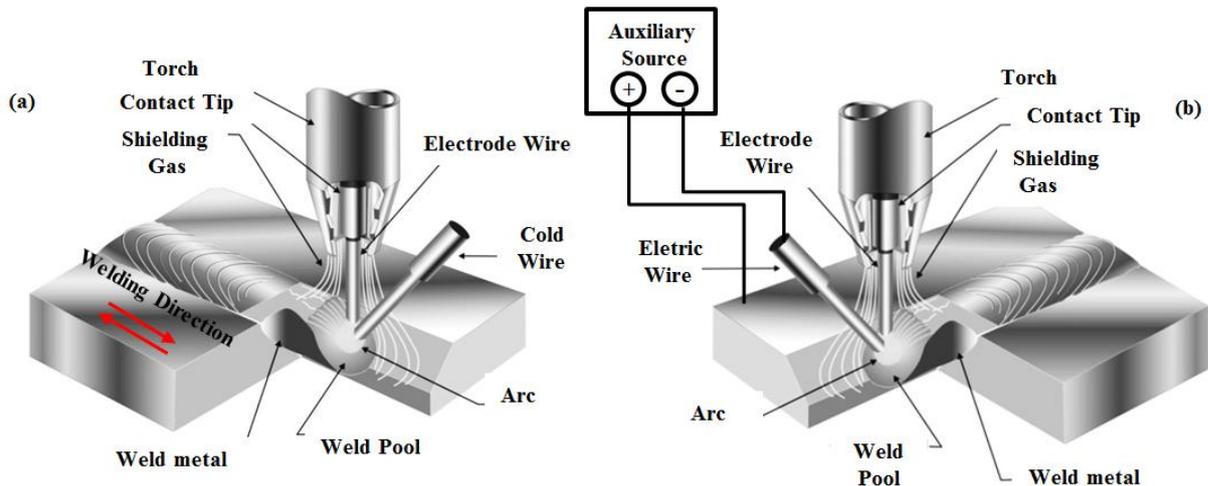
Scheme of the welding process (a) cold wire and (b) wire energized.
